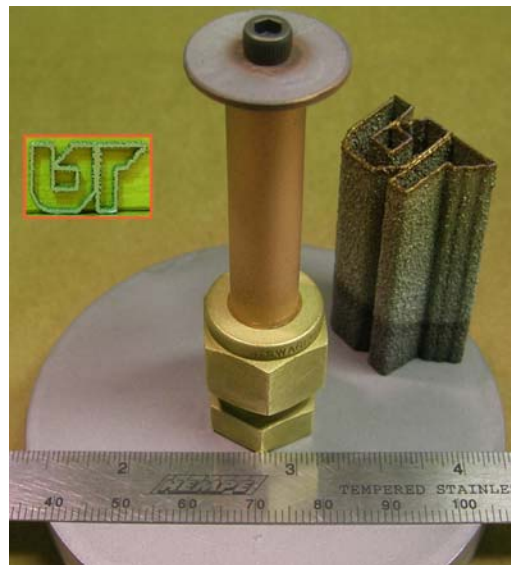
A 40 mm tall AISI H13 steel solid freeform fabricated extrusion of the University of Tennessee logo. The outlined insert, depicting a 2 mm thick slice of the UT logo extrusion, reveals that the AISI H13 material is fully dense.
